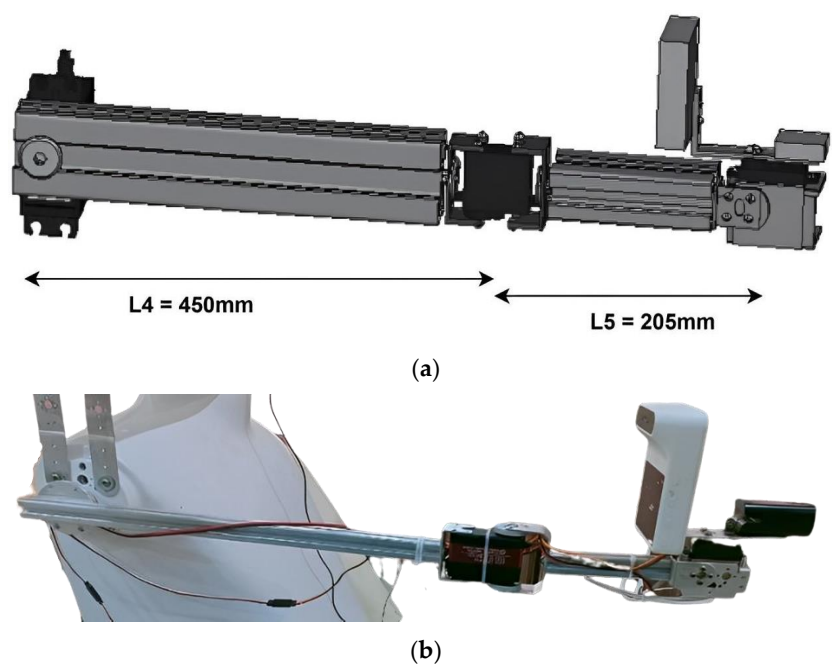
Right Arm of RoboDoc: (a) Right Arm CAD Design; (b) Physical Right Arm.
